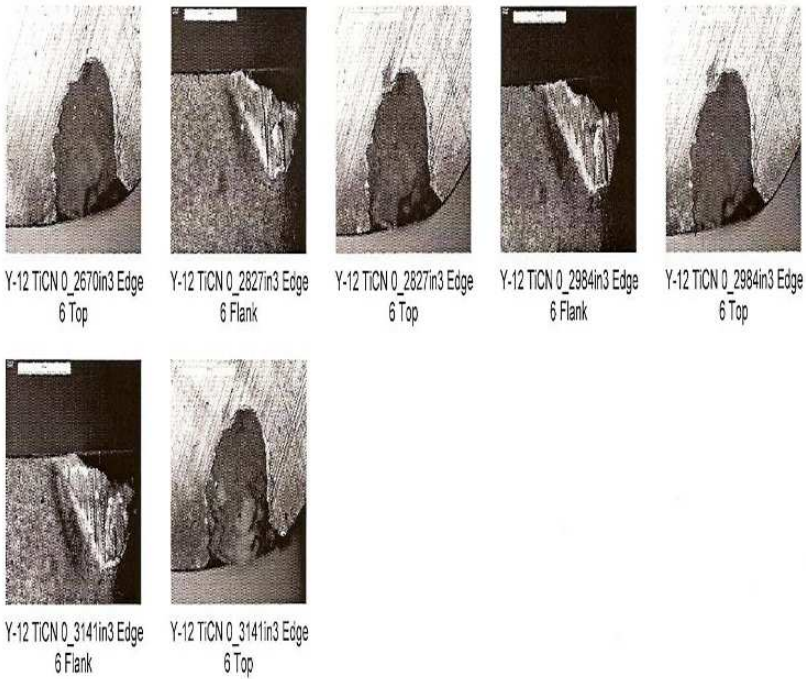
TiCN Tool Cutting Edge 6 machined at 121 RPM. 0.2670–0.3141 in³ of workpiece removed
